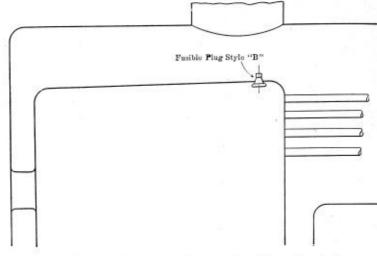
Locomotive Type or Star Watertube Boiler Fusible plug to be located in the highest point of crown sheet, and projecting through the sheet not less than 1 inch.
